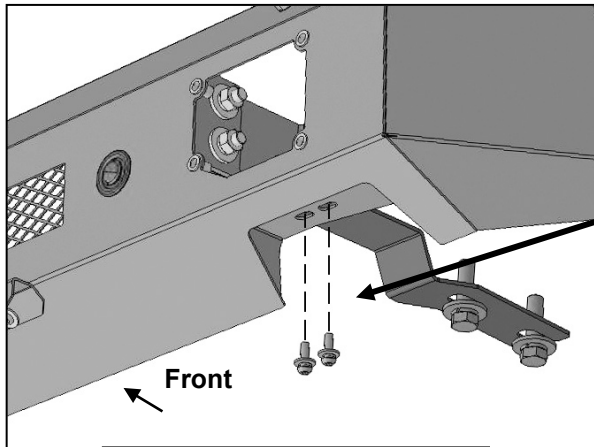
Driver/left side of Bumper attached to "L" Double Bolt Plate and Bracket
